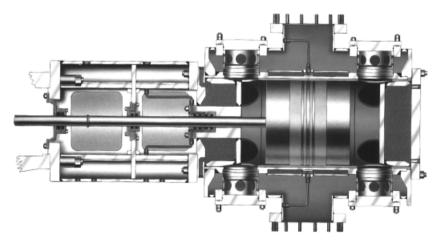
Forged steel cylinder with a tailrod design for pressures to 7500 psi. Tailrod construction is used to pressure-balance a piston or to achieve rod load reversals. This load reversal may be needed to properly lubricate the crosshead pin bearing. (*Dresser-Rand Company, Painted Post, N.Y.*)
